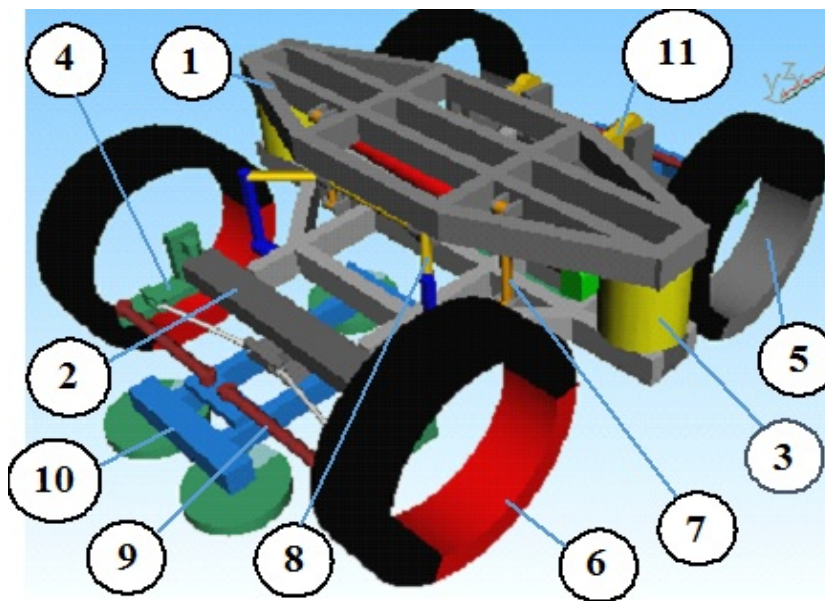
Bogie model: 1) bolster, 2) bogie frame, 3) air spring, 4) wheel plate, 5) brake wheel, 6) motor wheel, 7) damper, 8) antiroll bar, 9) steering, 10) guidewheel set, 11) stock axle.
